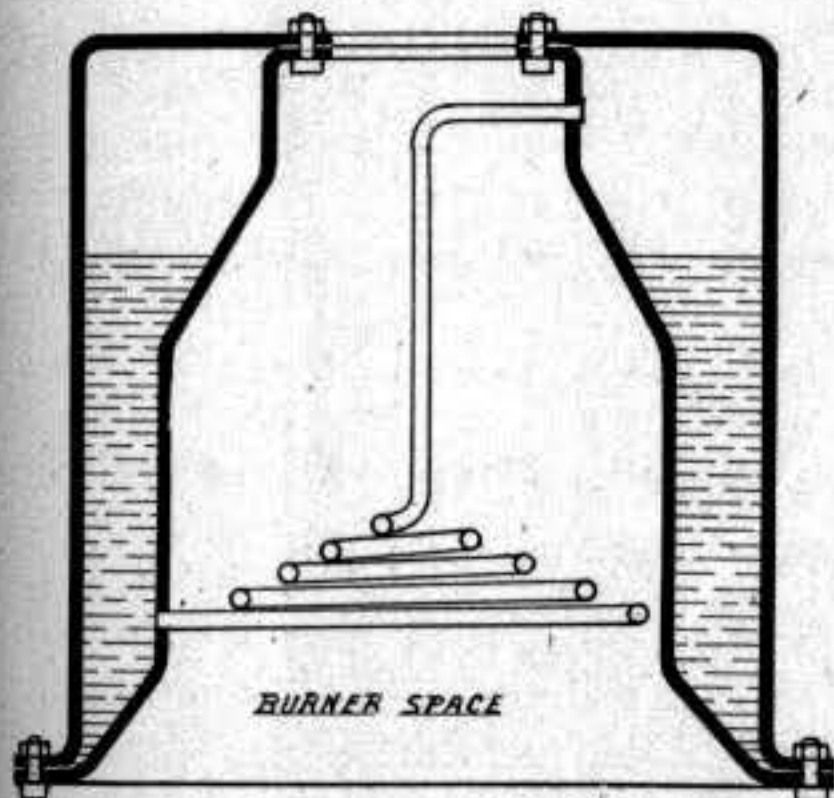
SKETCH OF BOILER, SHOWING ONE OF THE LIGHT COILS.
